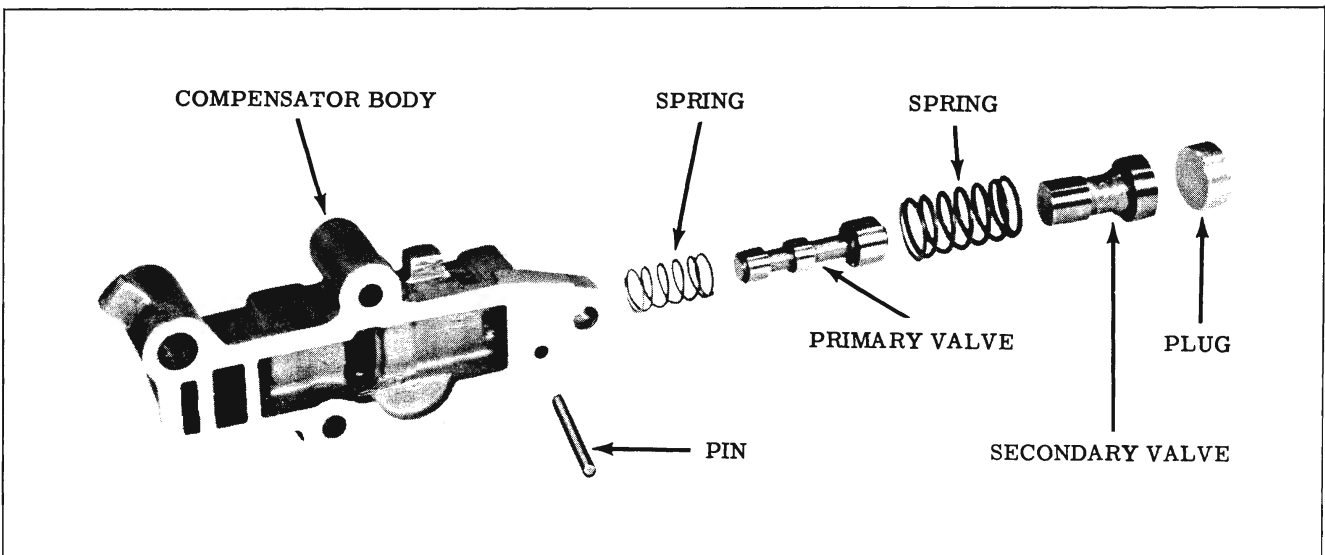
Two Stage Compensator Valve ("OA" & "OB")
